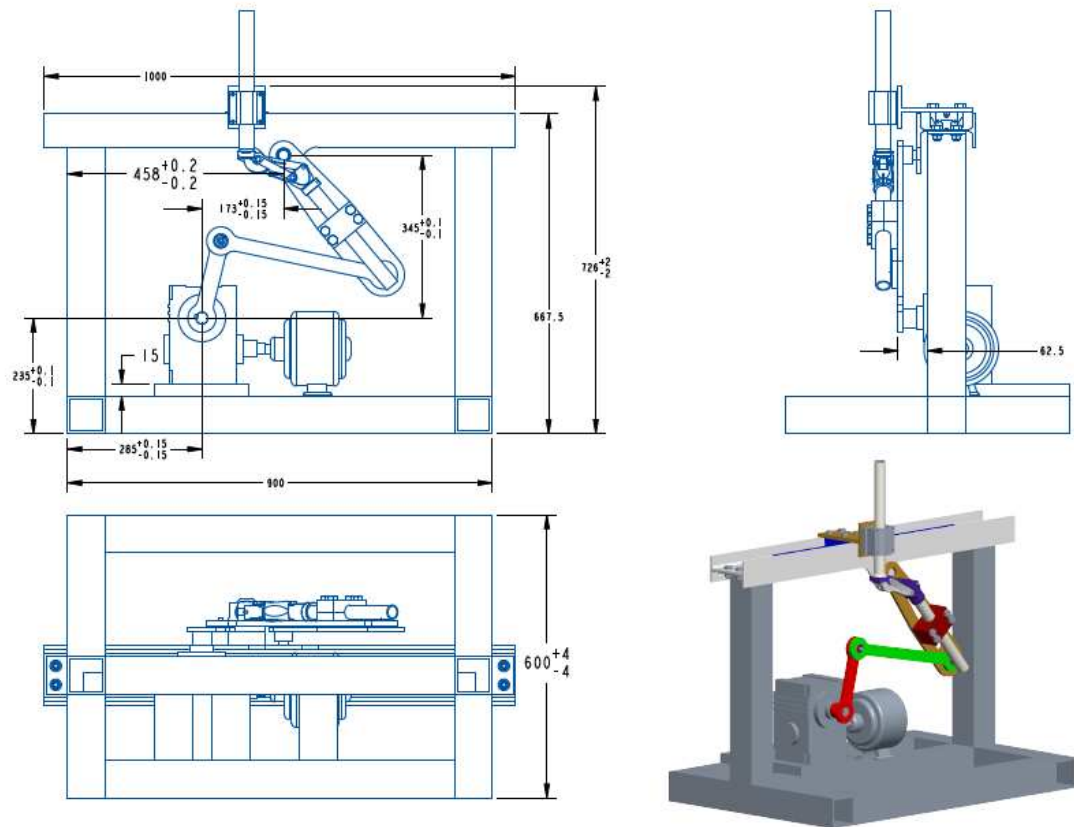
Complete Model: Dimensions and tolerances
